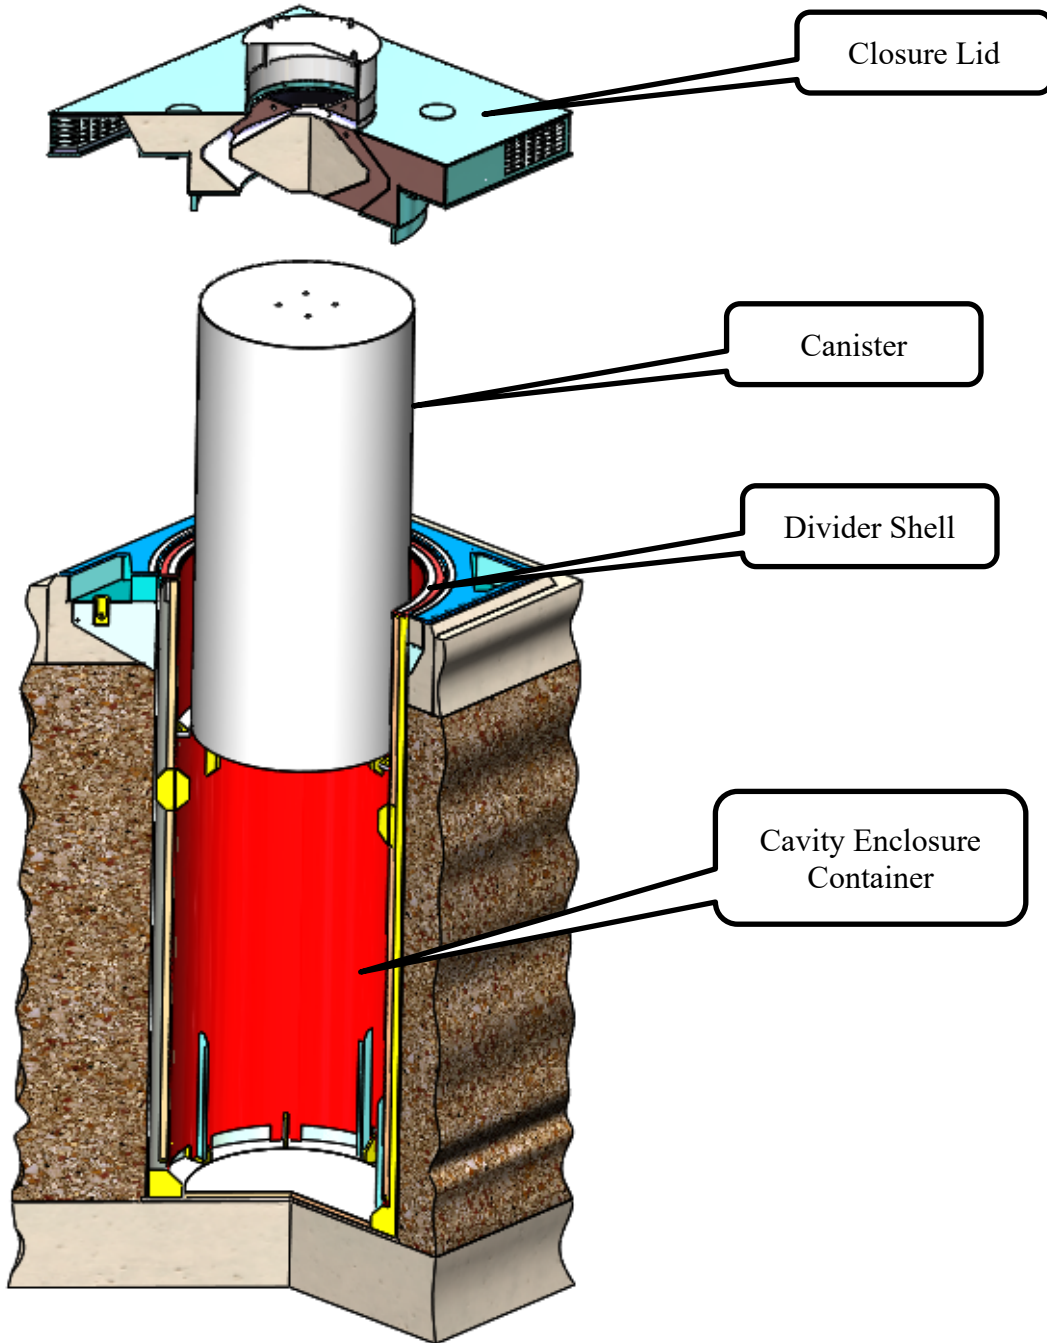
(a): VVM Components Shown in Exploded, Cut-Away View
